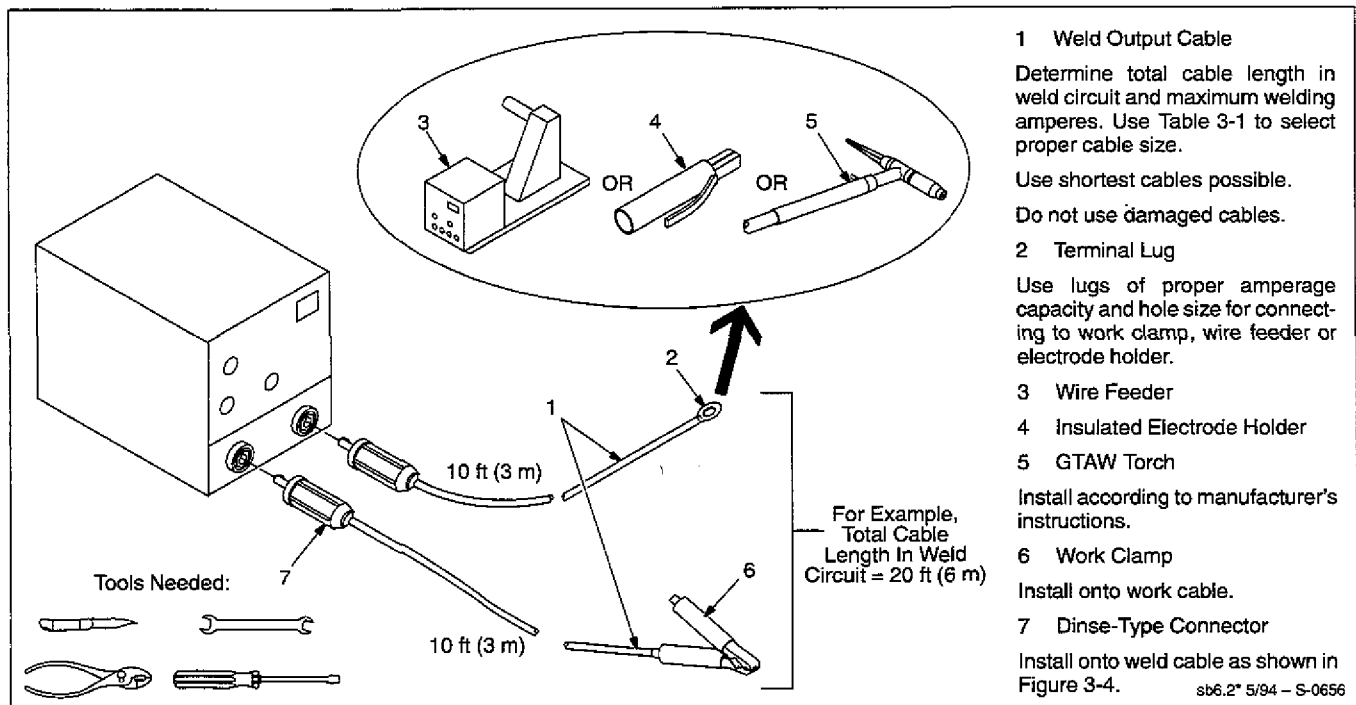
Selecting And Preparing Weld Output Cables
